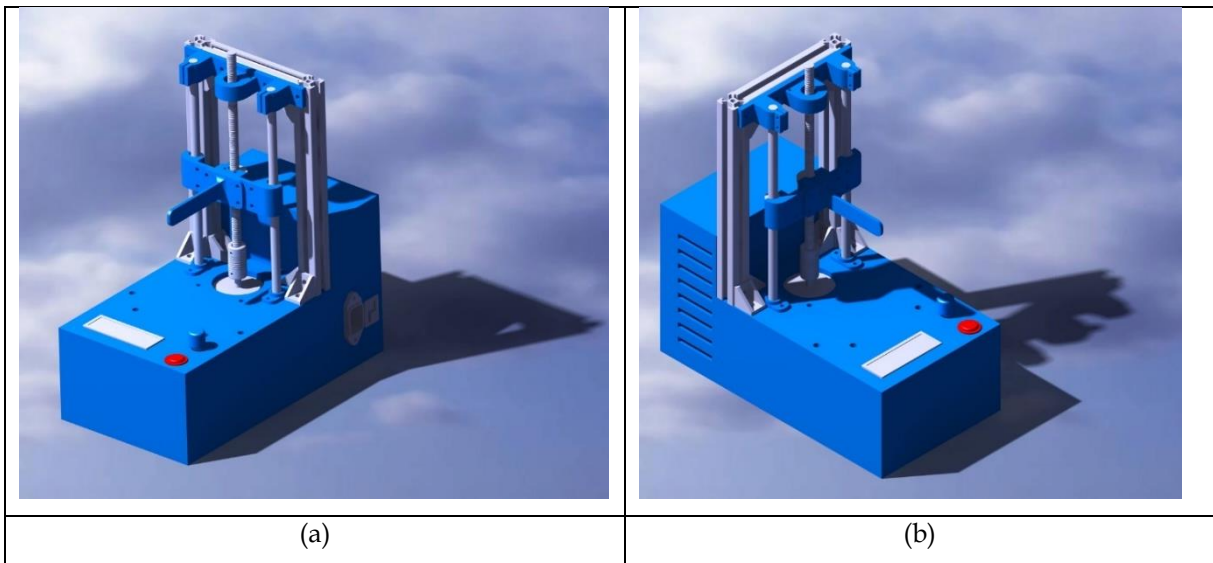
3D Design of The Tool (a) Right Side of View (b) Left Side of View
